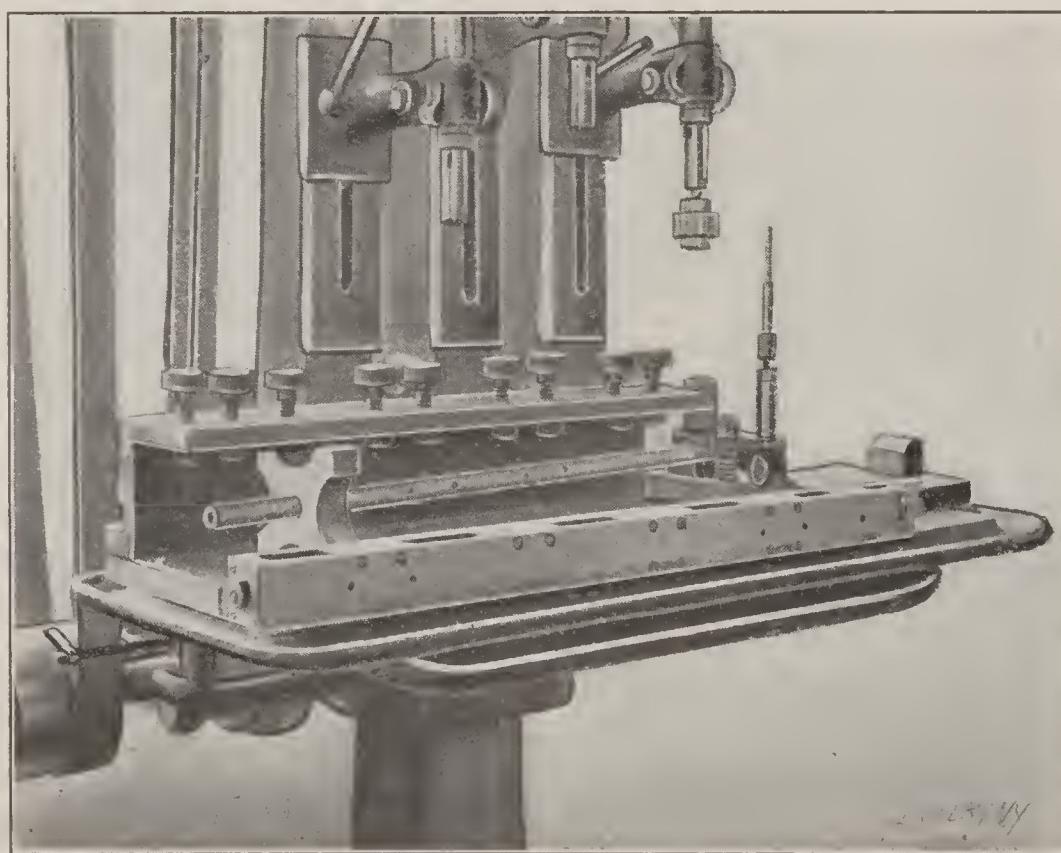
Fixtures for Drilling and Reaming Cam-shafts
